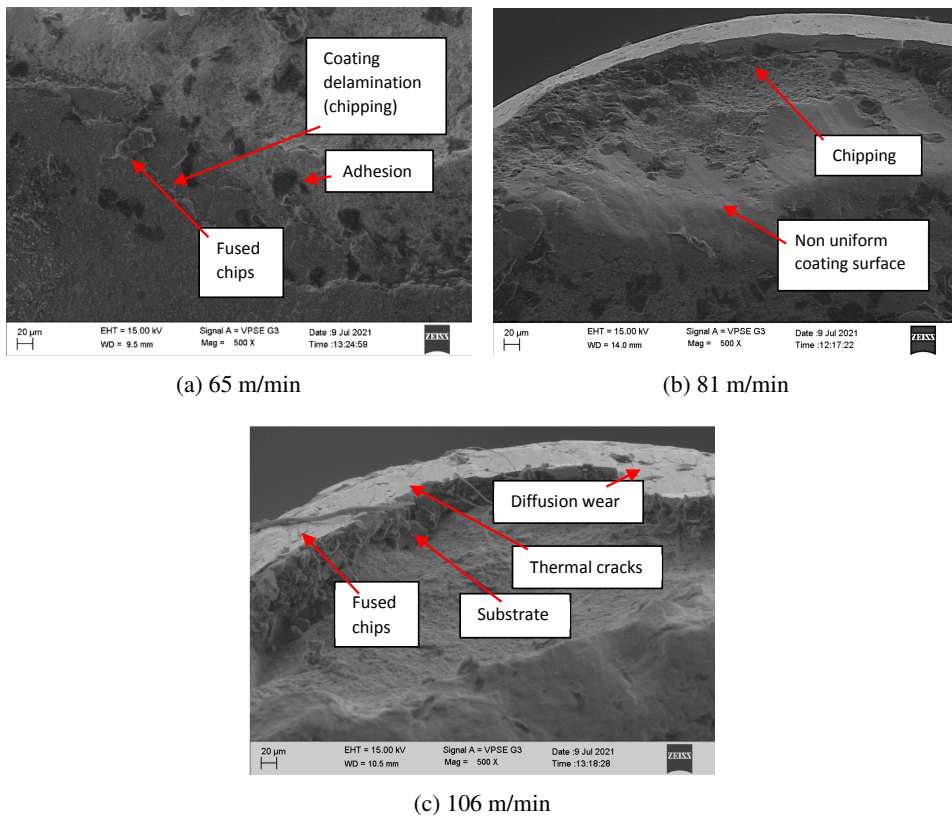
Detailed tool wear during the increase in various cutting speeds for machining Inconel 718
